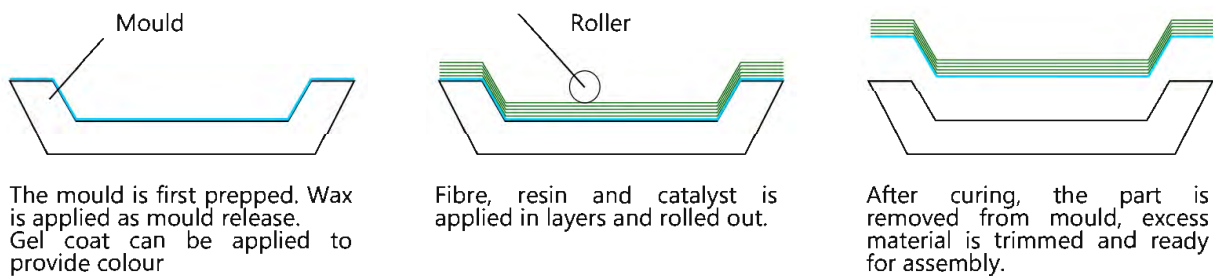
Step guide of hand lay-up manufacturing method (adapted from [43])
